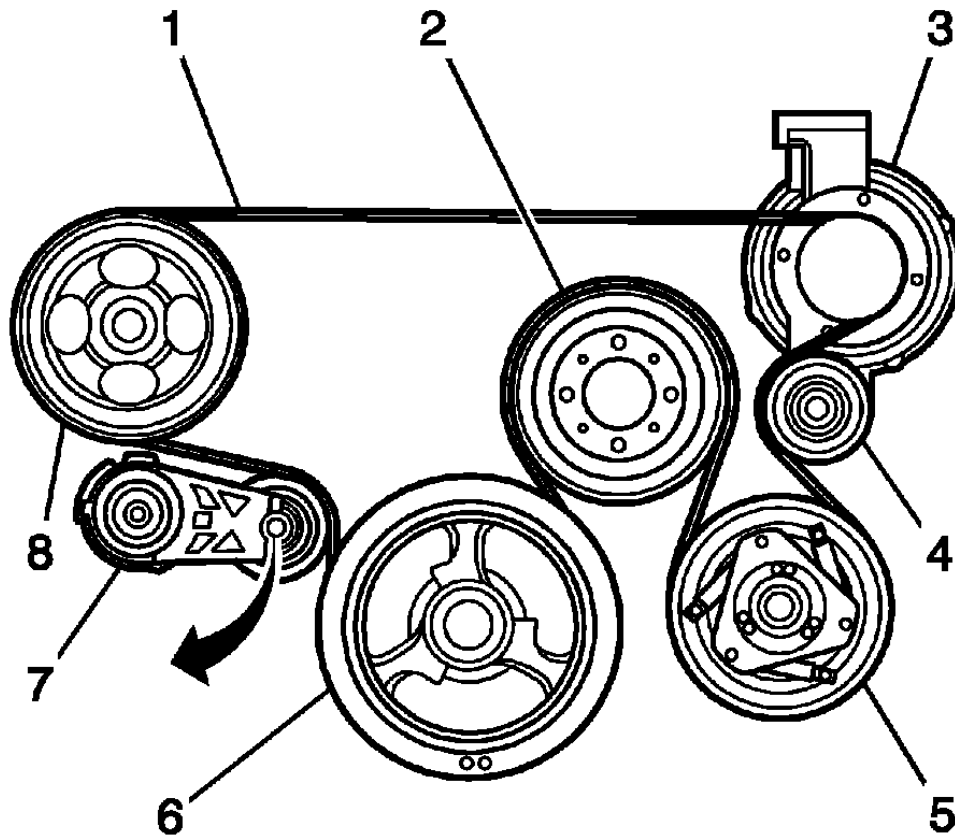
View Of Drive Belt Routing & Pulleys (With A/C)
